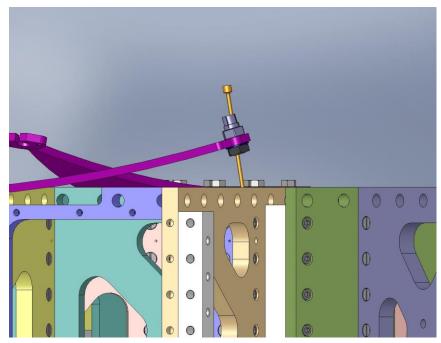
Torque the jam nut against the hex flange on the Flexure Mount.
